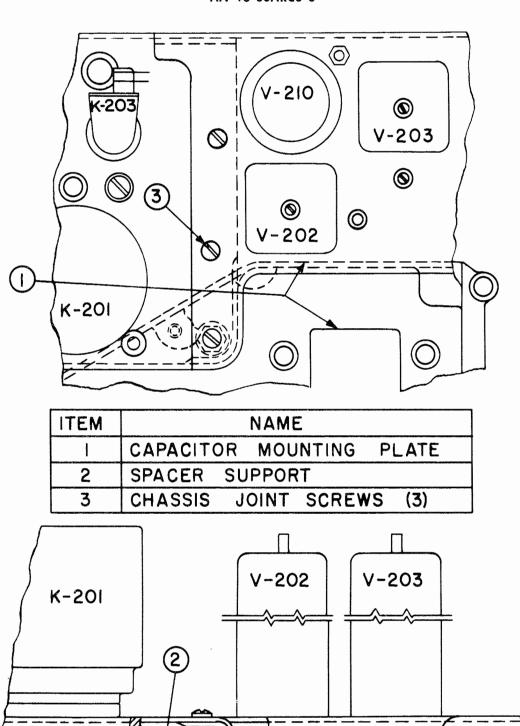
Radio Receiver R-77A/ARC-3 or R-428A/ARC-36, B Series—Split Chassis Joint
